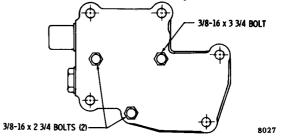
Splitter clutch control valve assembly retaining bolts (later VS2)
